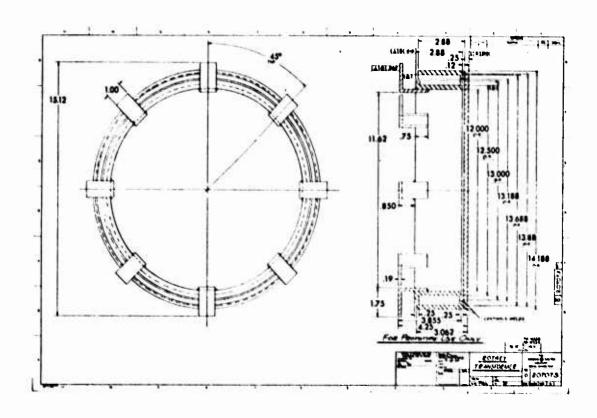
Prototype Rotary Transformer Fully Compatible with the UH-60A Tail Rotor Gearbox and Deicing Unit
